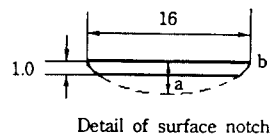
(b) Surface crack specimen(Weld Metal)
